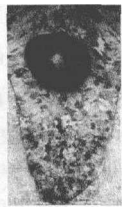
Porosity of welding joint with SiO₂ and the crystal morphology (100×)
